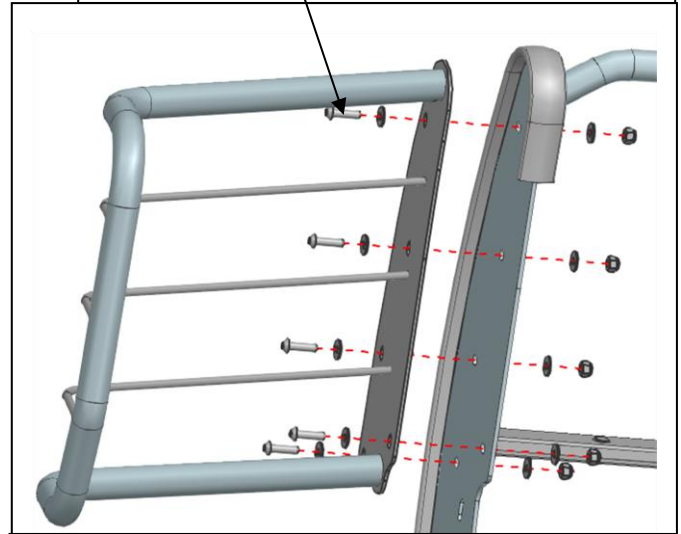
Attach driver side Frame Mounting Bracket to Upright
